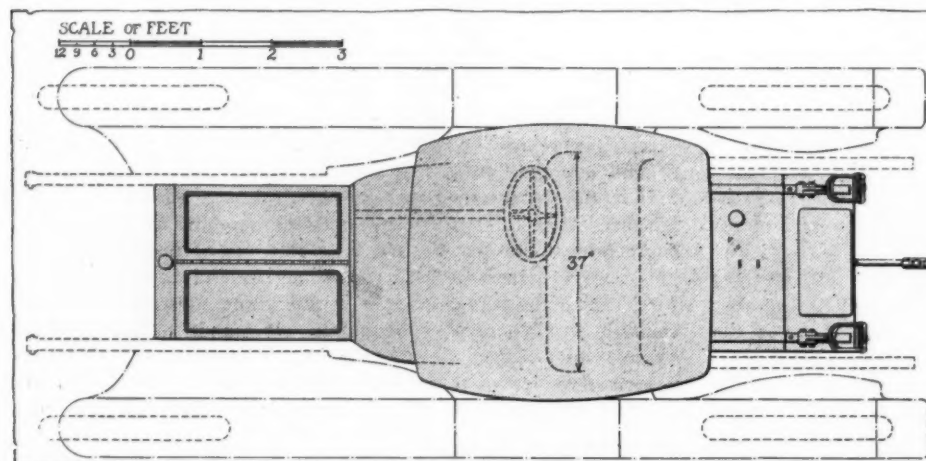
Plan view of suggested E.M.F. hansom type coupé
